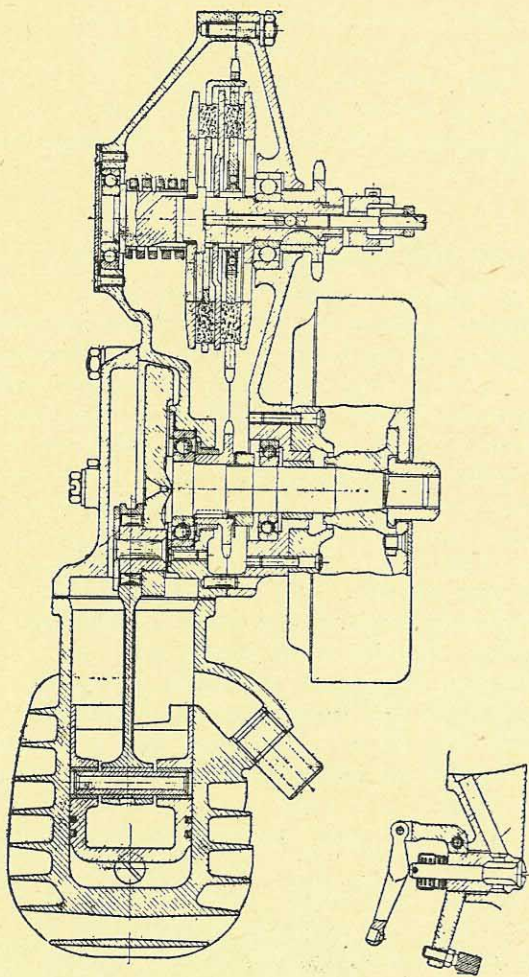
SECTIONAL ARRANGEMENT OF JUNIOR AUTOCYCLE ENGINE.
